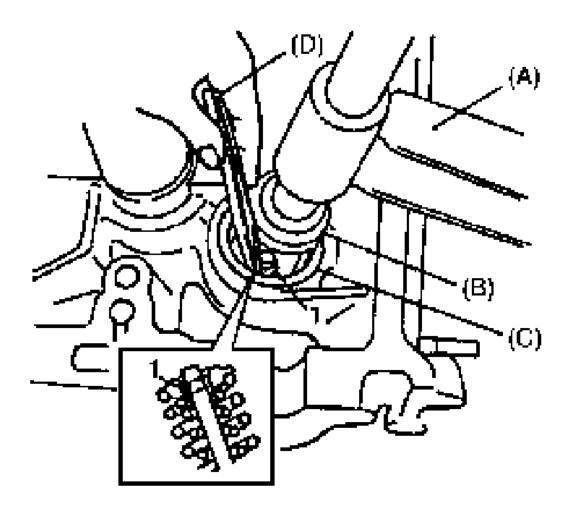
Installing Valve Spring And Spring Retainer Courtesy of SUZUKI OF AMERICA CORP.
